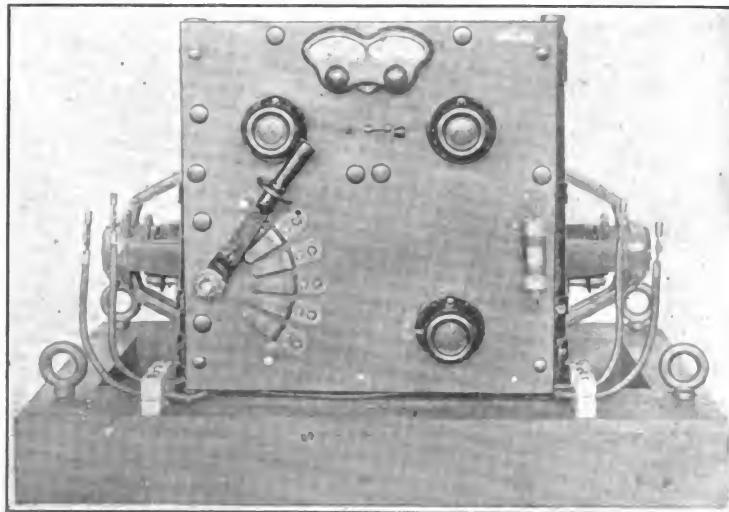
Constant energy arc welding set for metallic welding.
